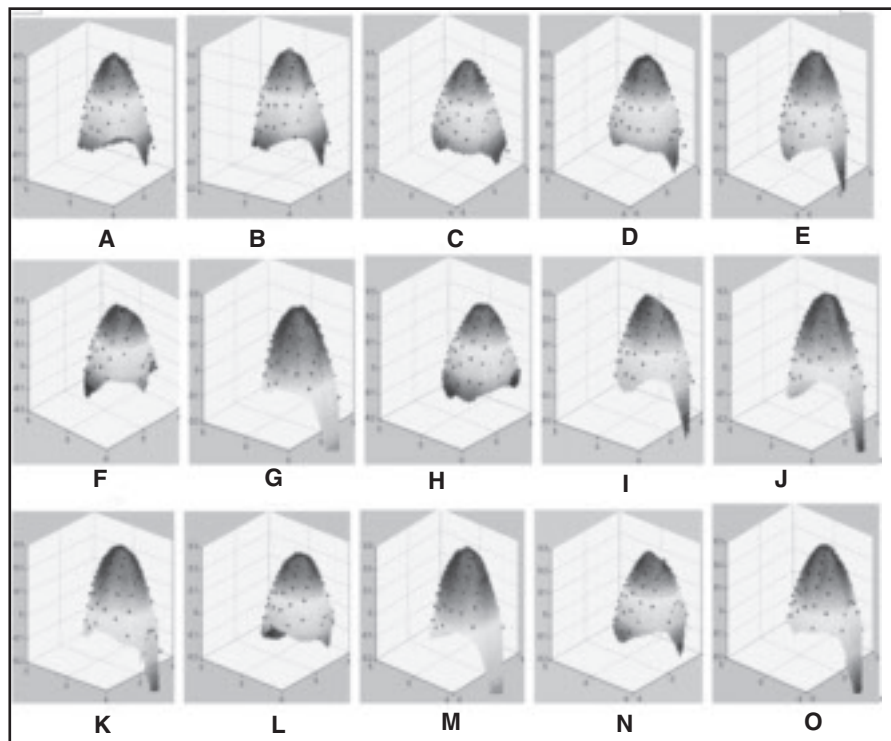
Reconstructed three-dimensional weld pool surfaces.
